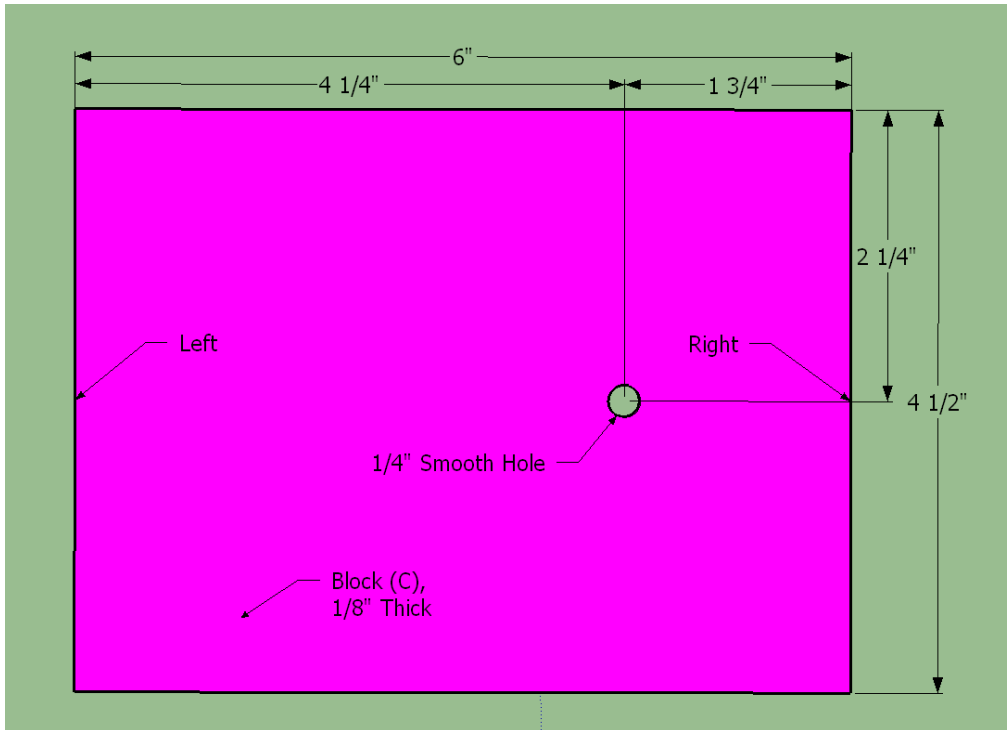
Block (C)- Sample Holder of Rectangular Specimens.
